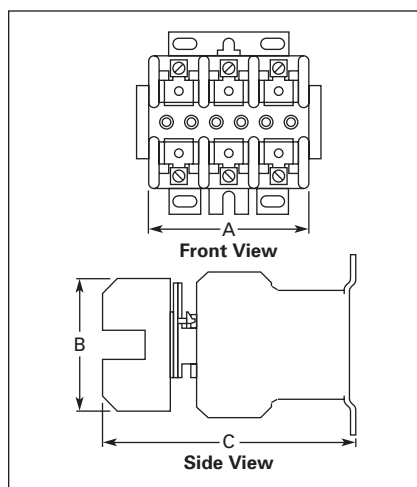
3-Pole Fuse Block and Contactor Dimensions
